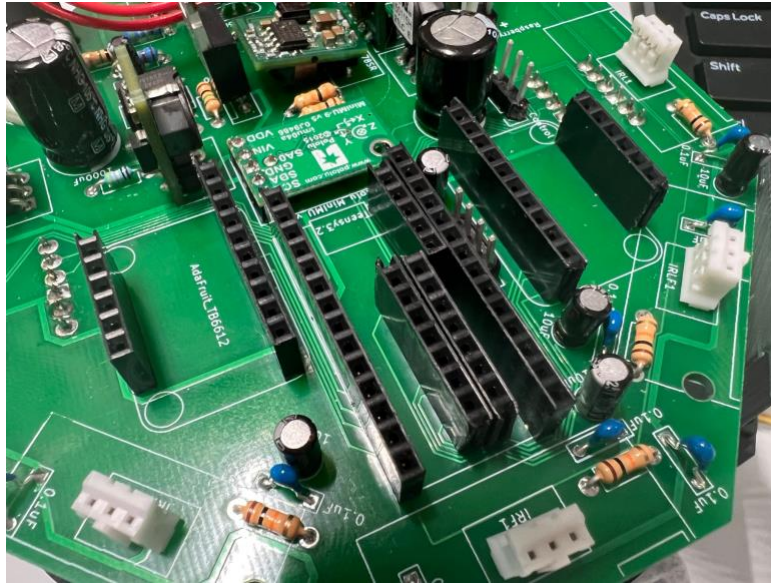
Showing a straighter soldering of the female socket rows into the PCB.
